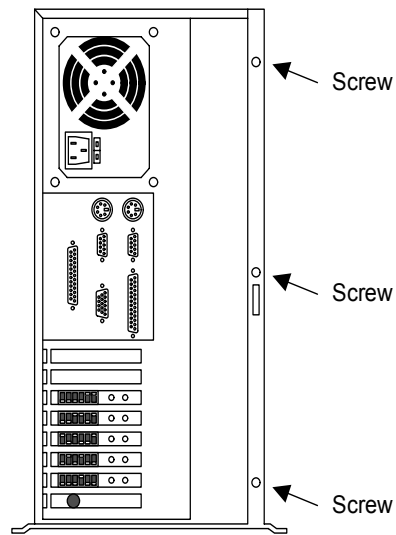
Main Processors and Front-End Processors—Cover Removal
